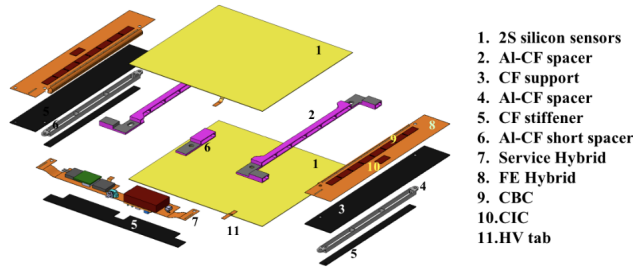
An exploded view of the CMS 2S module with the different components.
